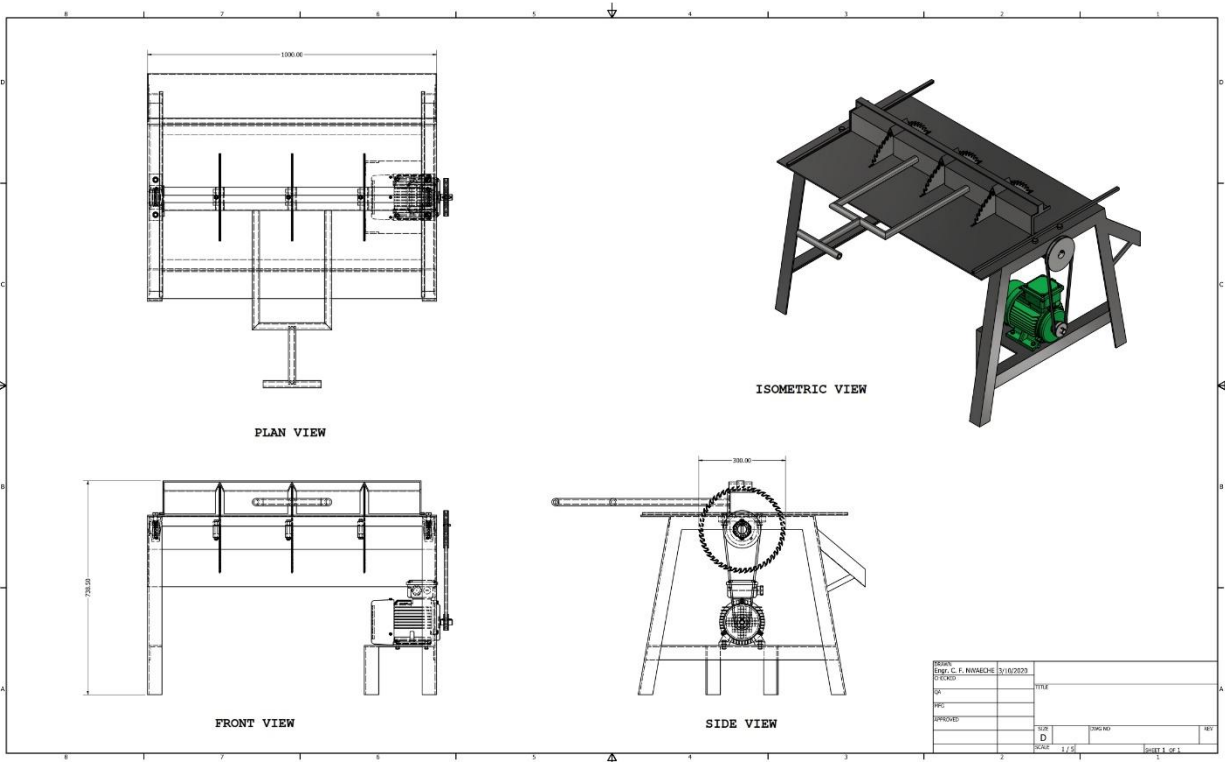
Orthographic view of the 3-blade cassava cutting machine
